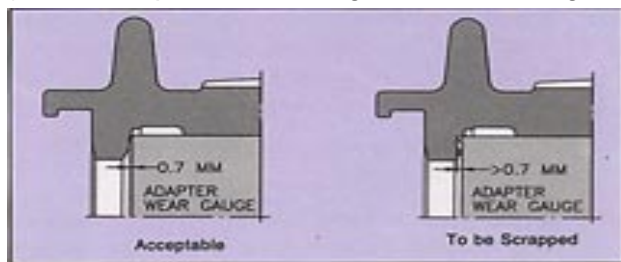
Checking Wear of Thrust Shoulder Faces
